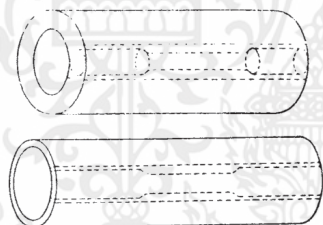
Squeezing Jig for Flattening Ends of Full-Size Tension Test Specimens
